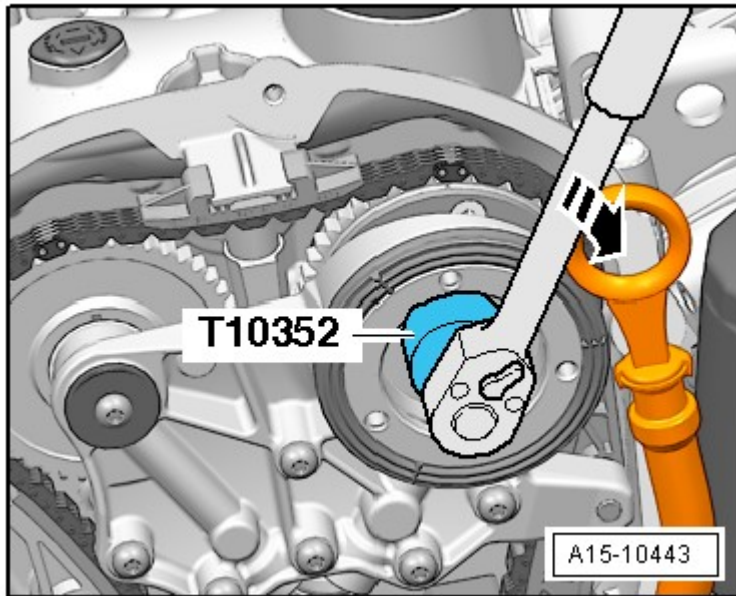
Identifying Assembly Tool T10352 To Remove Control Valve
